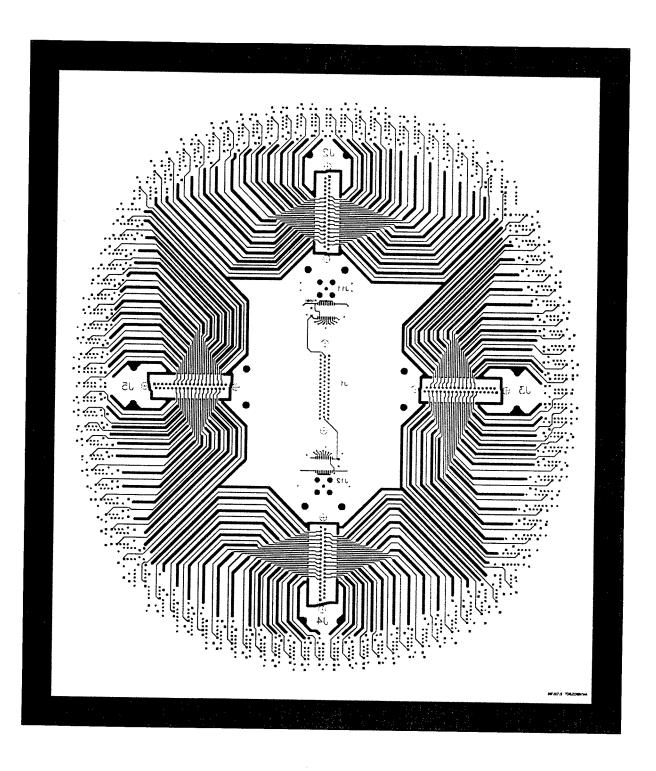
Bottom Circuit Layer of Analog Test Fixture.
